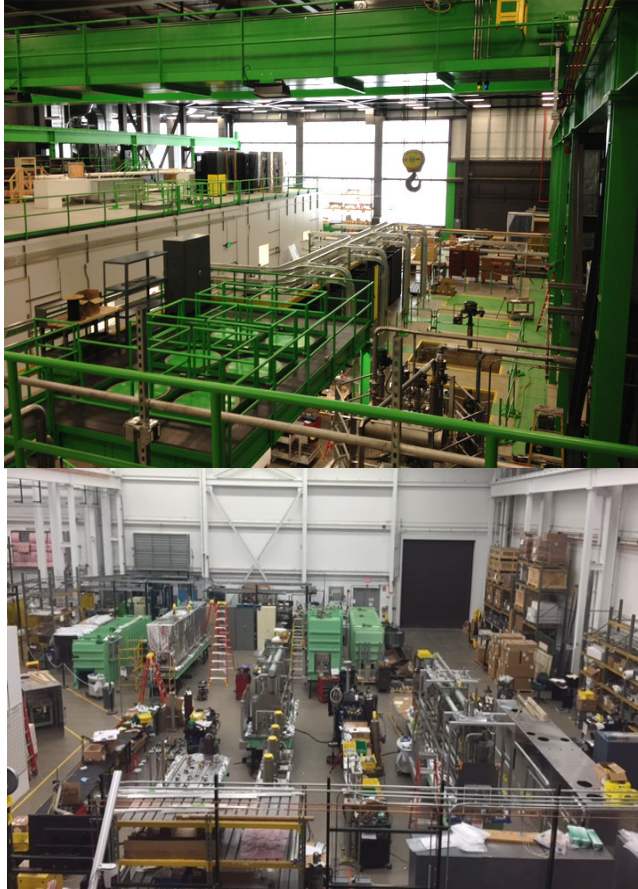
The SRF highbay (top) and the cryomodule assembly area (bottom) housing six parallel assembly lines delivering more than one cryomodule per month.
